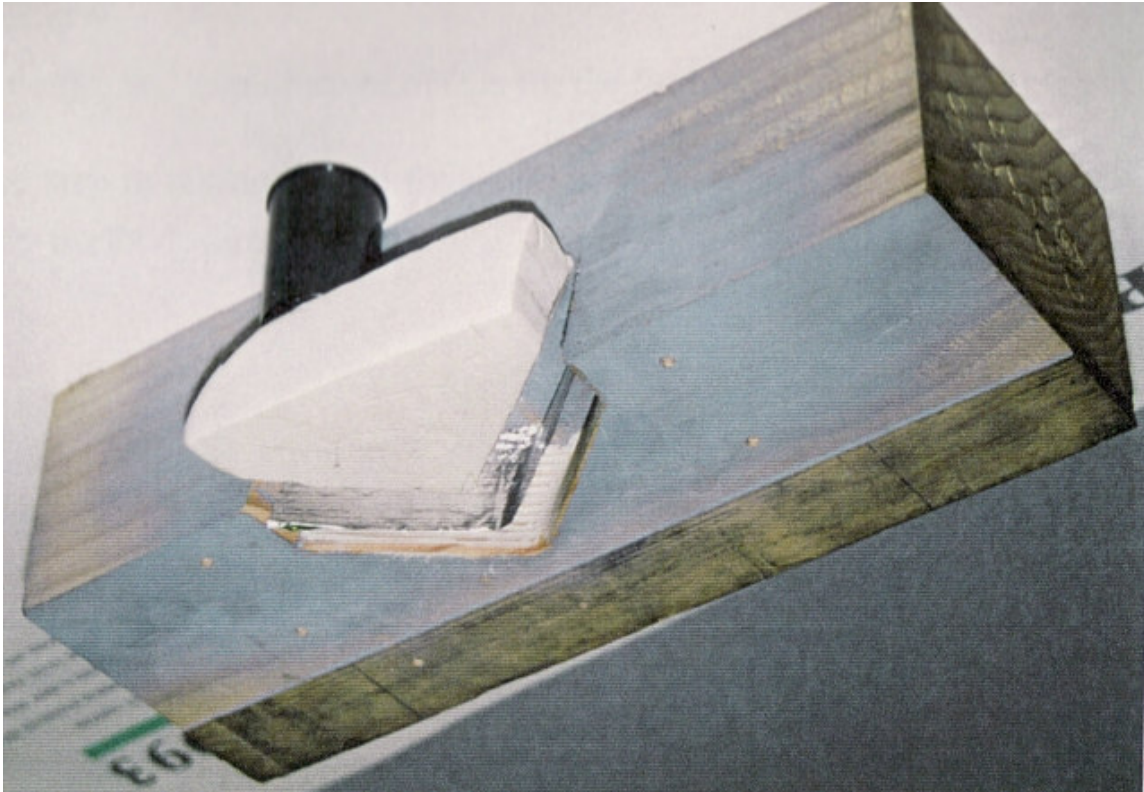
Cylindrical Folded Developable with folding radius added.
